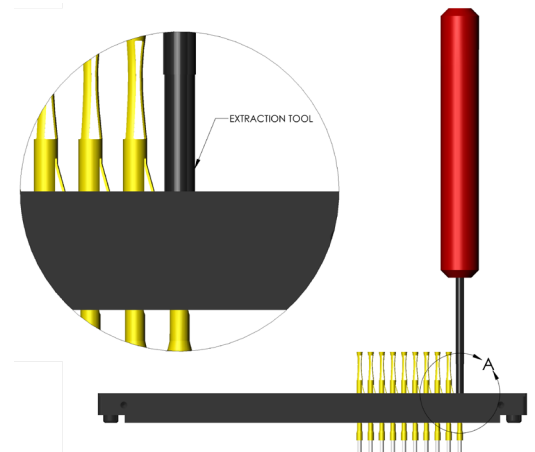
Figure C. Ensure that the tool is kept perpendicular to the module face to avoid damage to the contact or tool.
